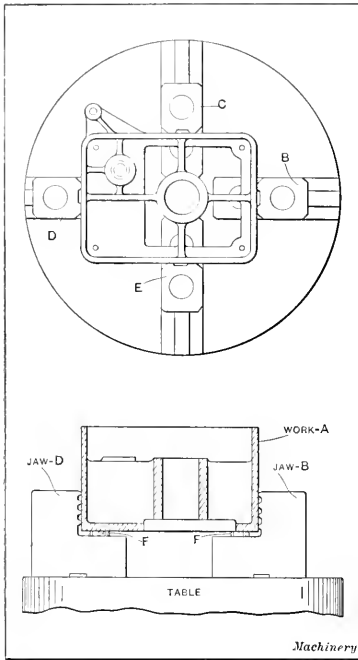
Use of Four-jaw Chuck for holding Rectangular Work on a Vertical Lathe or Boring Mill
